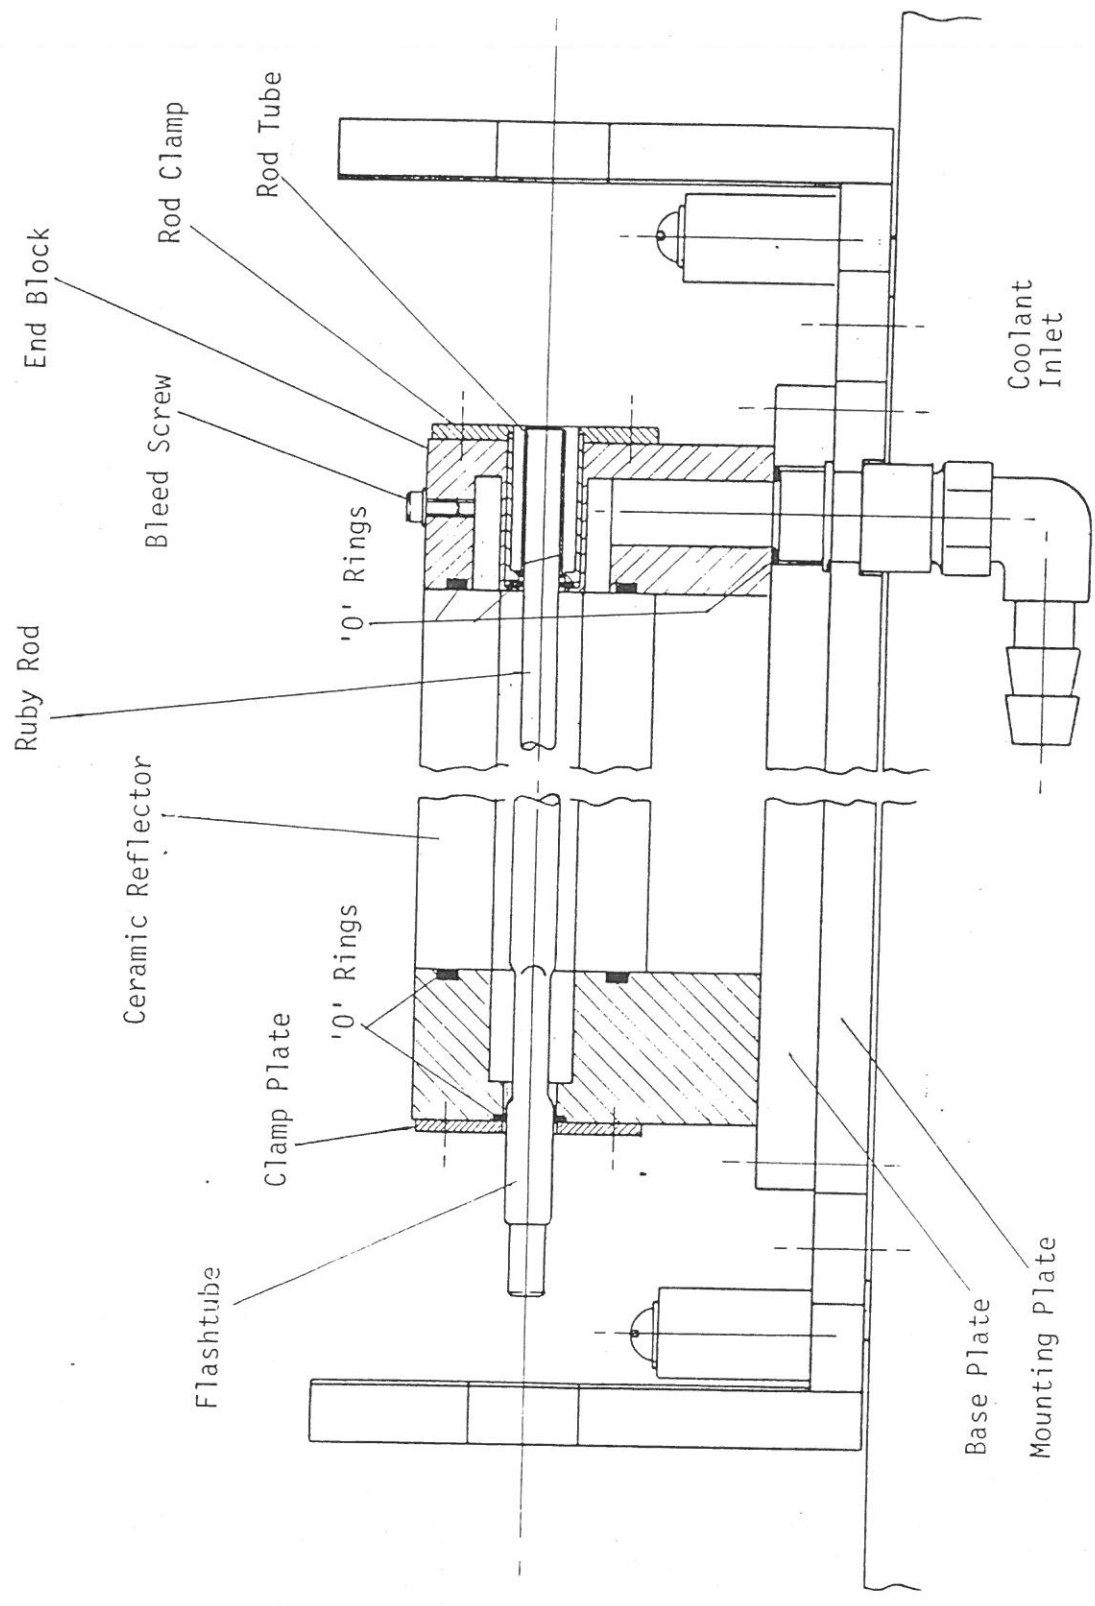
CROSS-SECTIONS OF LASER HEAD ASSEMBLY SHOWING FLASHTUBE (LEFT) AND ROD (RIGHT)
